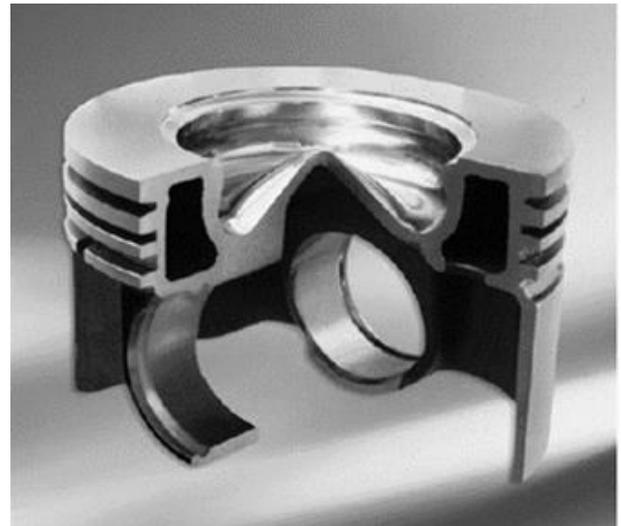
Cross-section of a steel piston of a passenger car [18]
